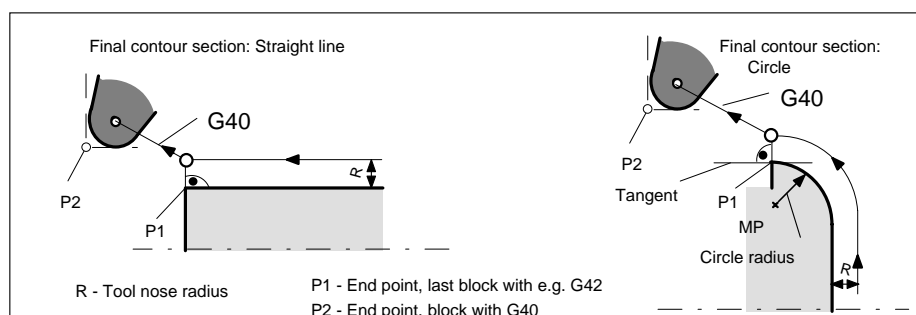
Cancellation of tool radius compensation using G40, example shows G42, tool point direction=3
